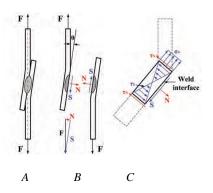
Stress analysis in the weld area: A — Weld rotation; B— IF failure; C — PO failure (Ref. 14).
